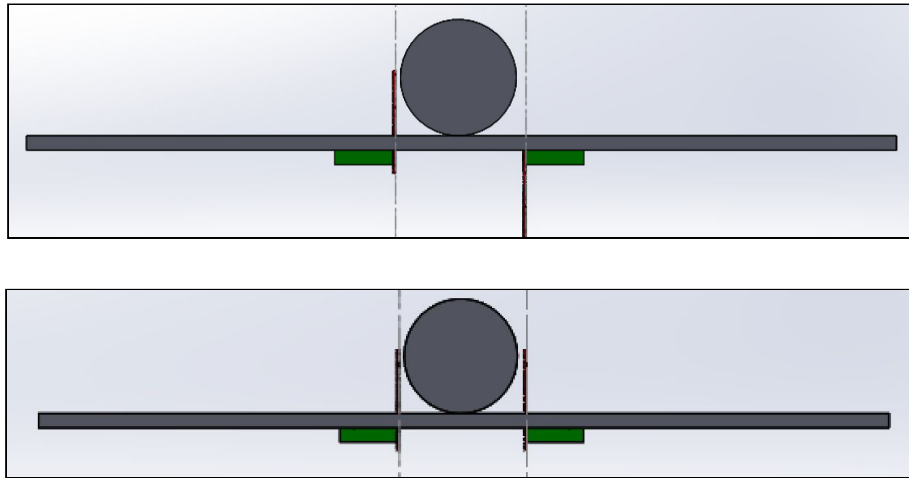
Demonstration of dispensing mechanism (side view, incline not shown)
